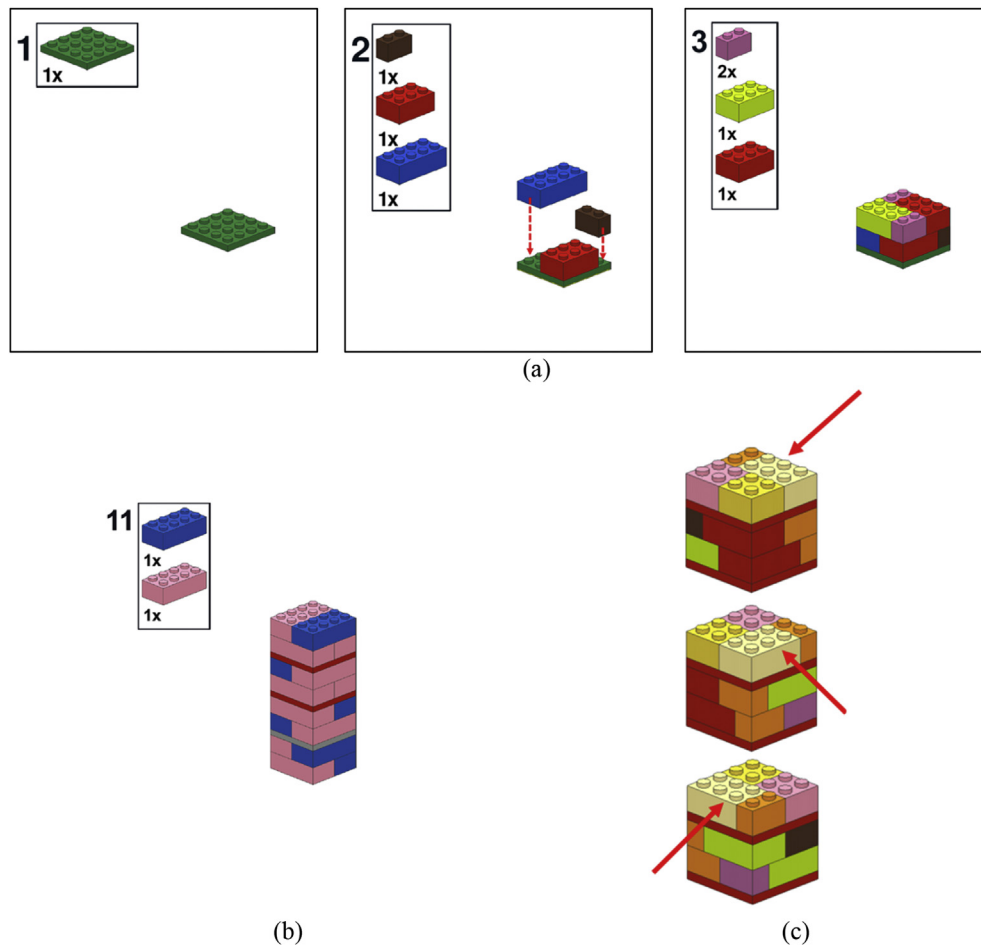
(a) An example step-by-step primary task assembly manual; (b) an example 11th-layer similar-simple interruption assembly manual; and (c) the manual for the similar-complex interruption task.
